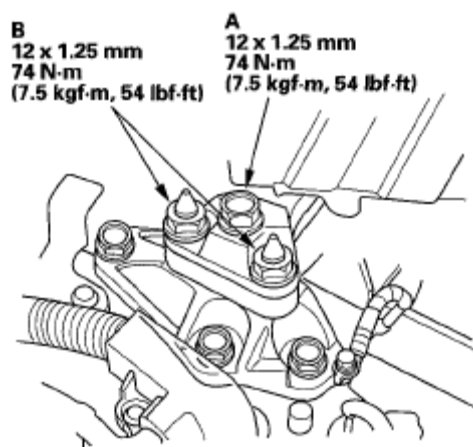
Identifying Transmission Mounting Bolt, Nuts & Torque Specification
